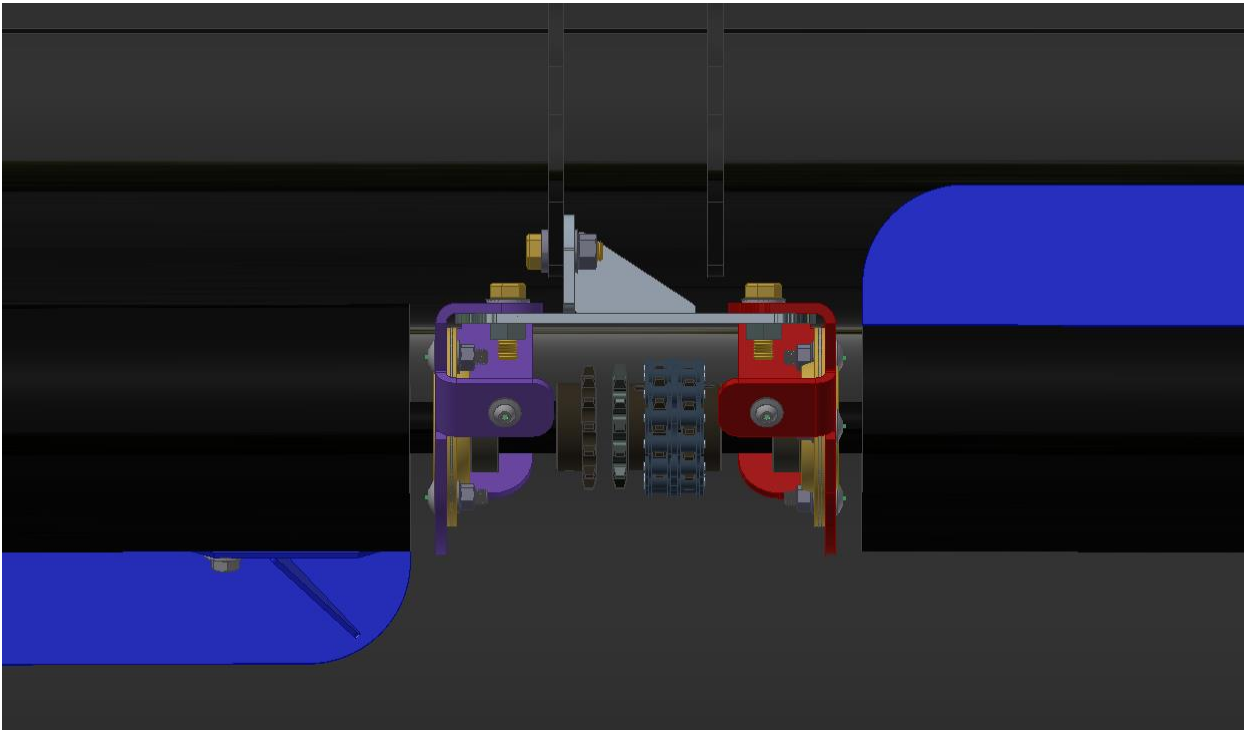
DUAL SPROCKET WITH CHAIN COUPLER INSTALLED ON LH AUGER
